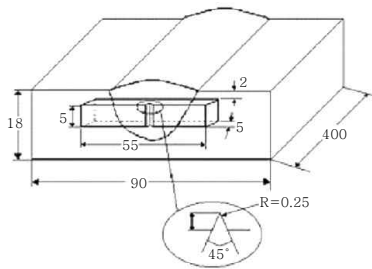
Schematic diagram of subsize Charpy V notch impact test specimen in the weld joint geometry(unit: mm)
